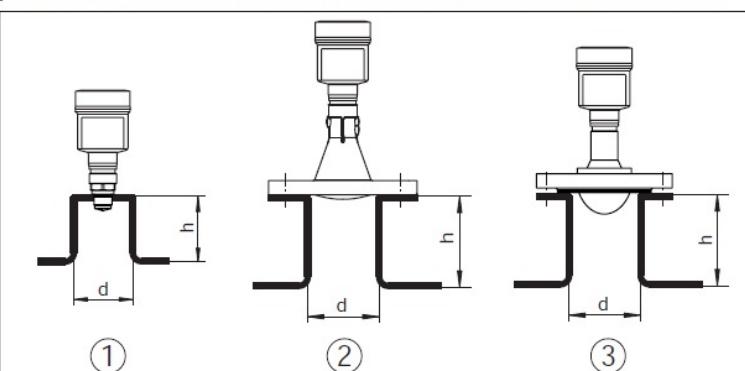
Socket mounting with deviating socket dimensions with different versions of LEVEL TRANSMITTER 8139
